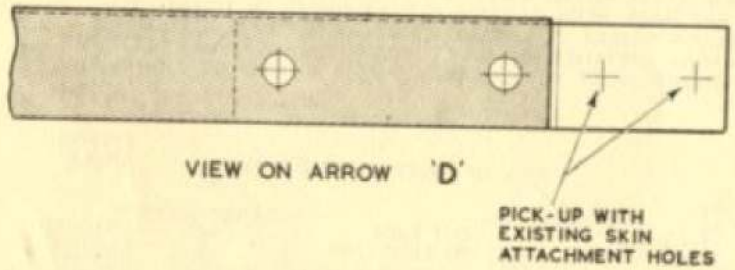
Method of repairing cracked diaphragms — end rib assembly of inboard elevators
